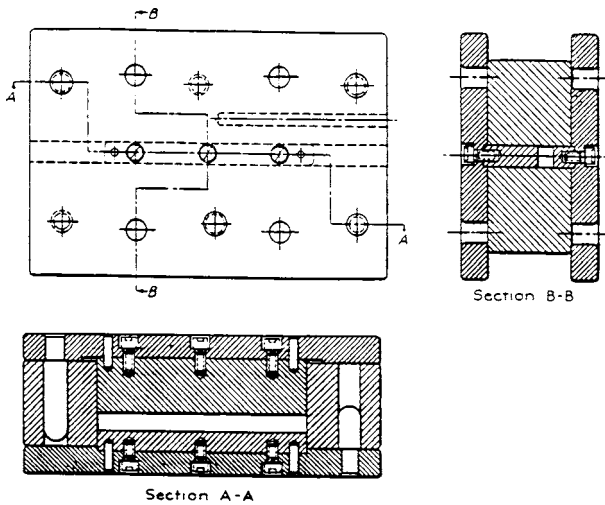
Single-Cavity Positive-Compression Mold for Bar Test Specimens
